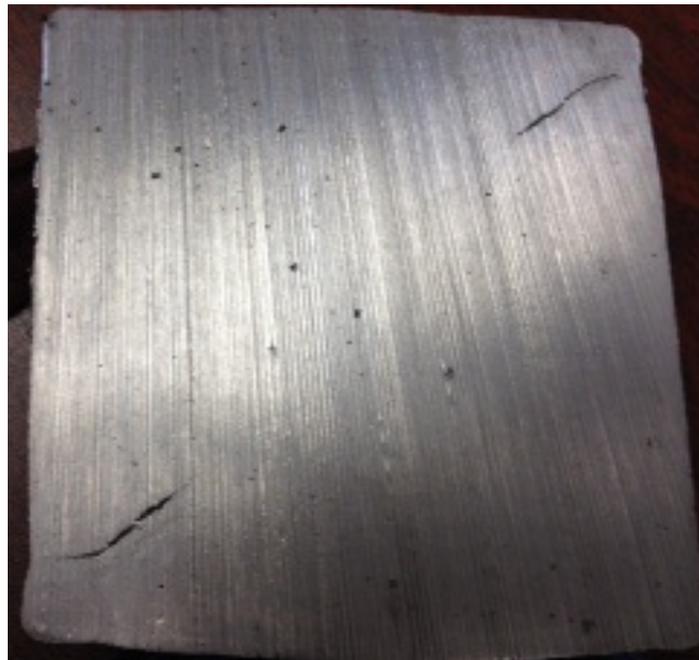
Off-corner hinge cracks from rhomboid billet shape
